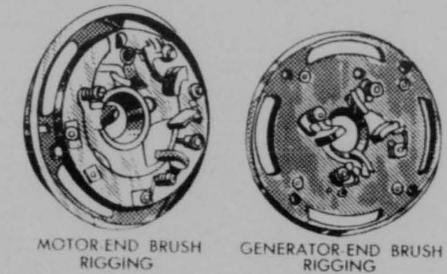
Brush-Rigging Assemblies Mounted on End Shields.
